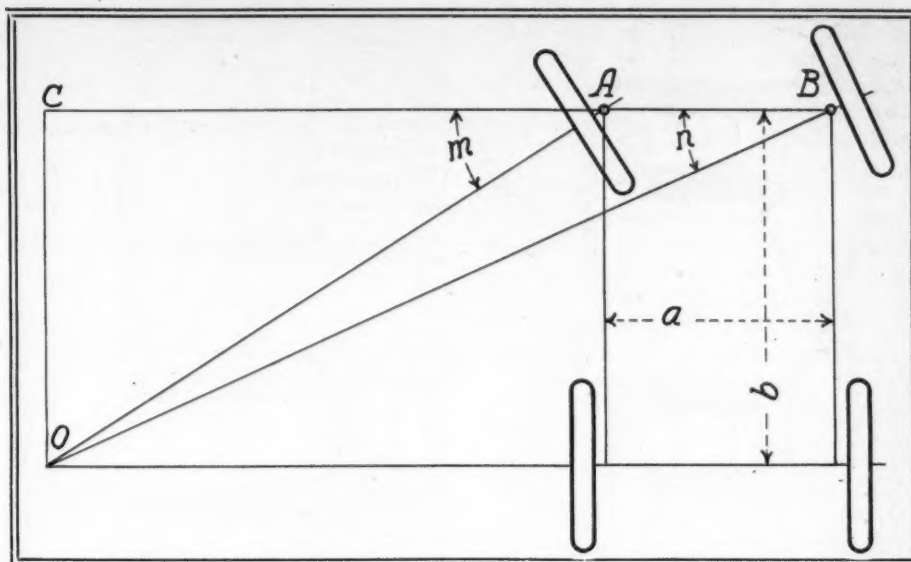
DESIGNING STEERING KNUCKLE ARMS
